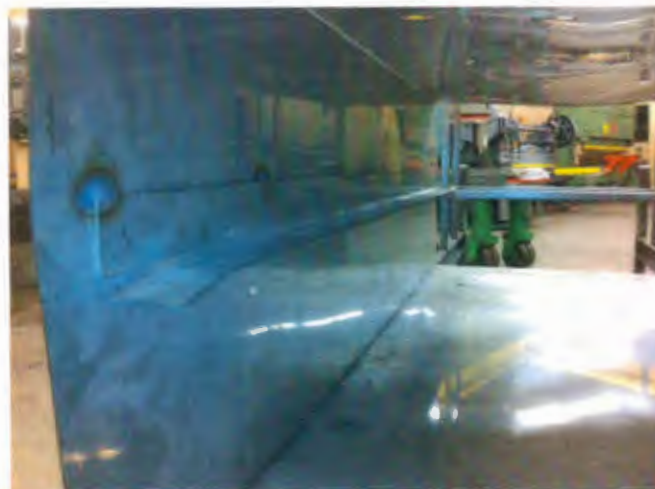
The Belt Guide Rails Installed Inside the Oven Box
